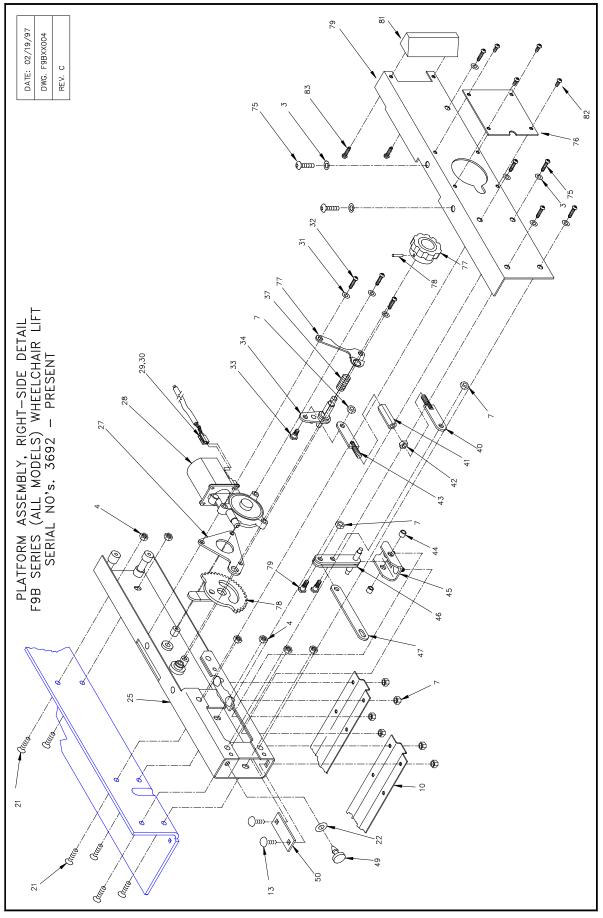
PLATFORM ASSEMBLY, RIGHT SIDE DETAIL
